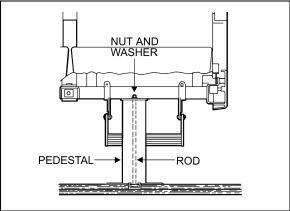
SEAT PEDESTAL ASSEMBLY
